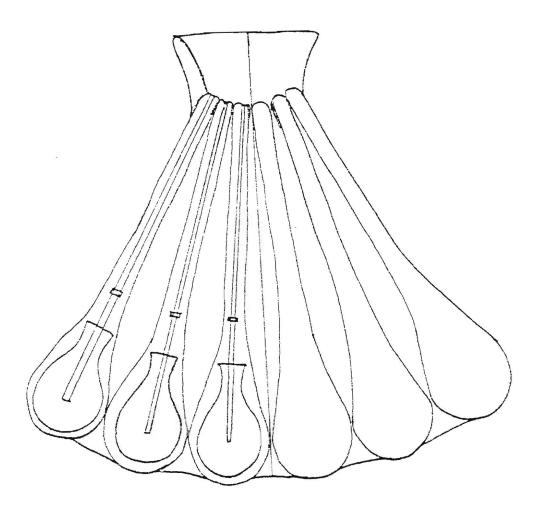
Reconstruction sketch of a fan-shaped composite mould incorporating six individual spoon moulds.
